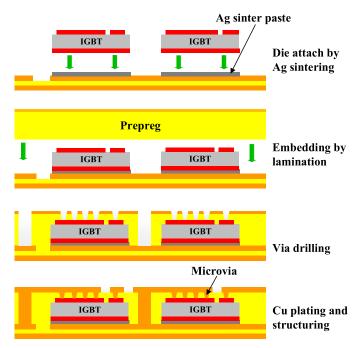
Process flow of PCB embedded IGBT module developed by Fraunhofer IZM and TU Berlin.
